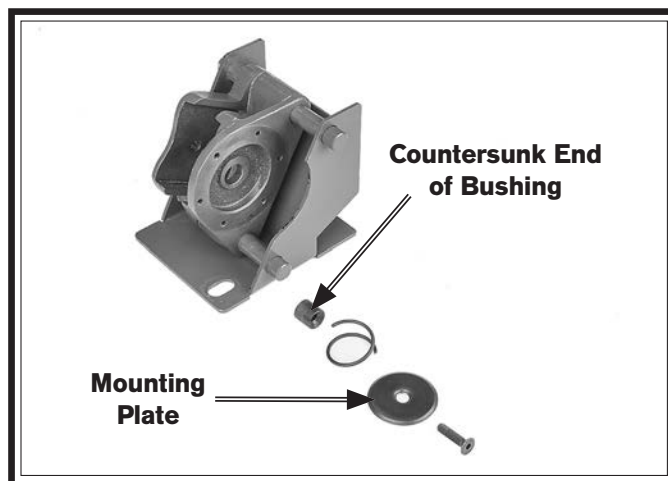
Location of brake mounting plate, compression spring, bushing, outer brake pad, and securing screw (inner brake pad removed for clarity).
